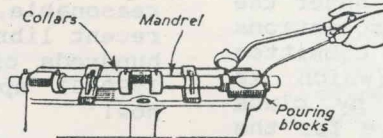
Re-metalling Ford main bearings in the crankcase with the re-metalling fixture in place.
